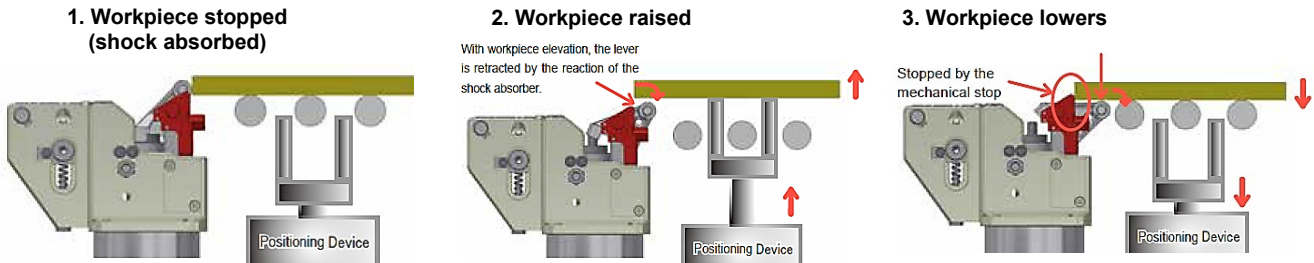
Workpiece Stopped with the Mechanical Stop
